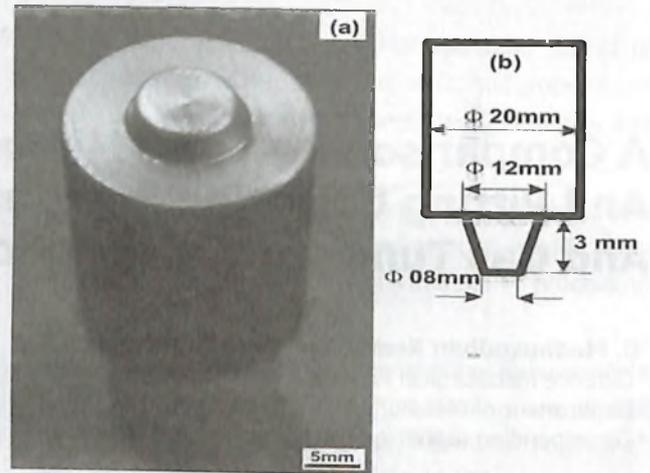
(a) W-Mo FSW tool (b) Schematic showing tool dimensions
